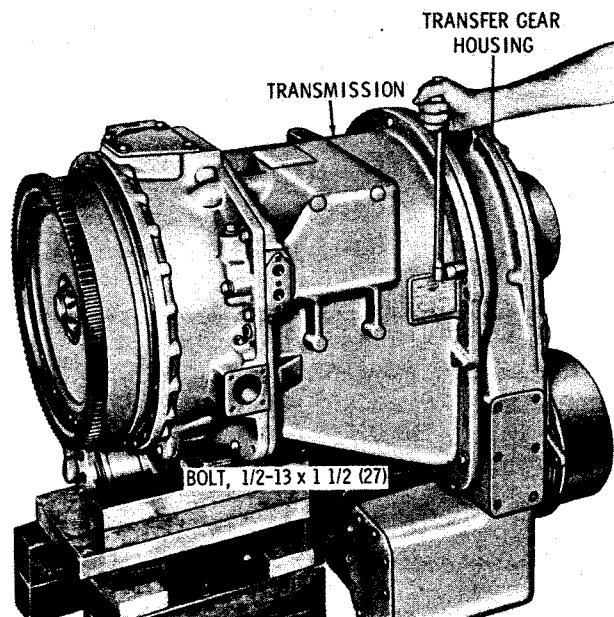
Installing transmission-to-transfer gear housing bolts
